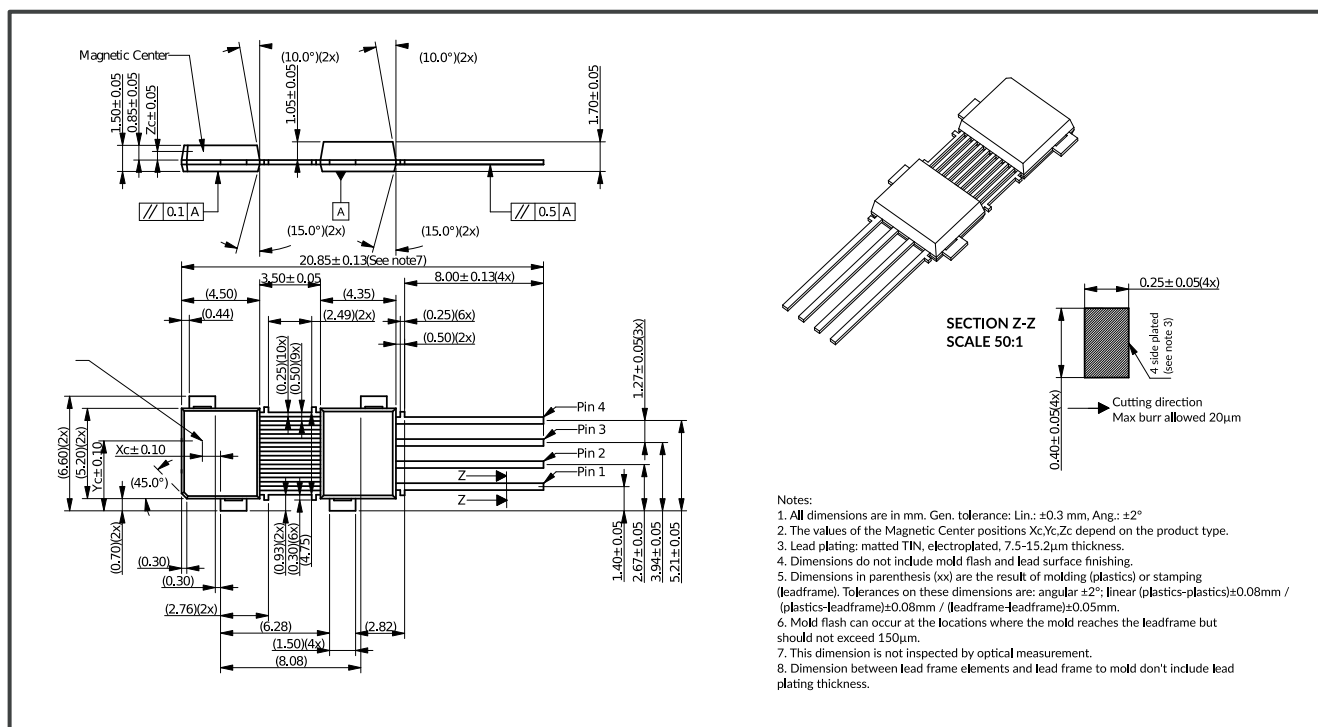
DMP-4 Straight Leads Package Outline Drawing
